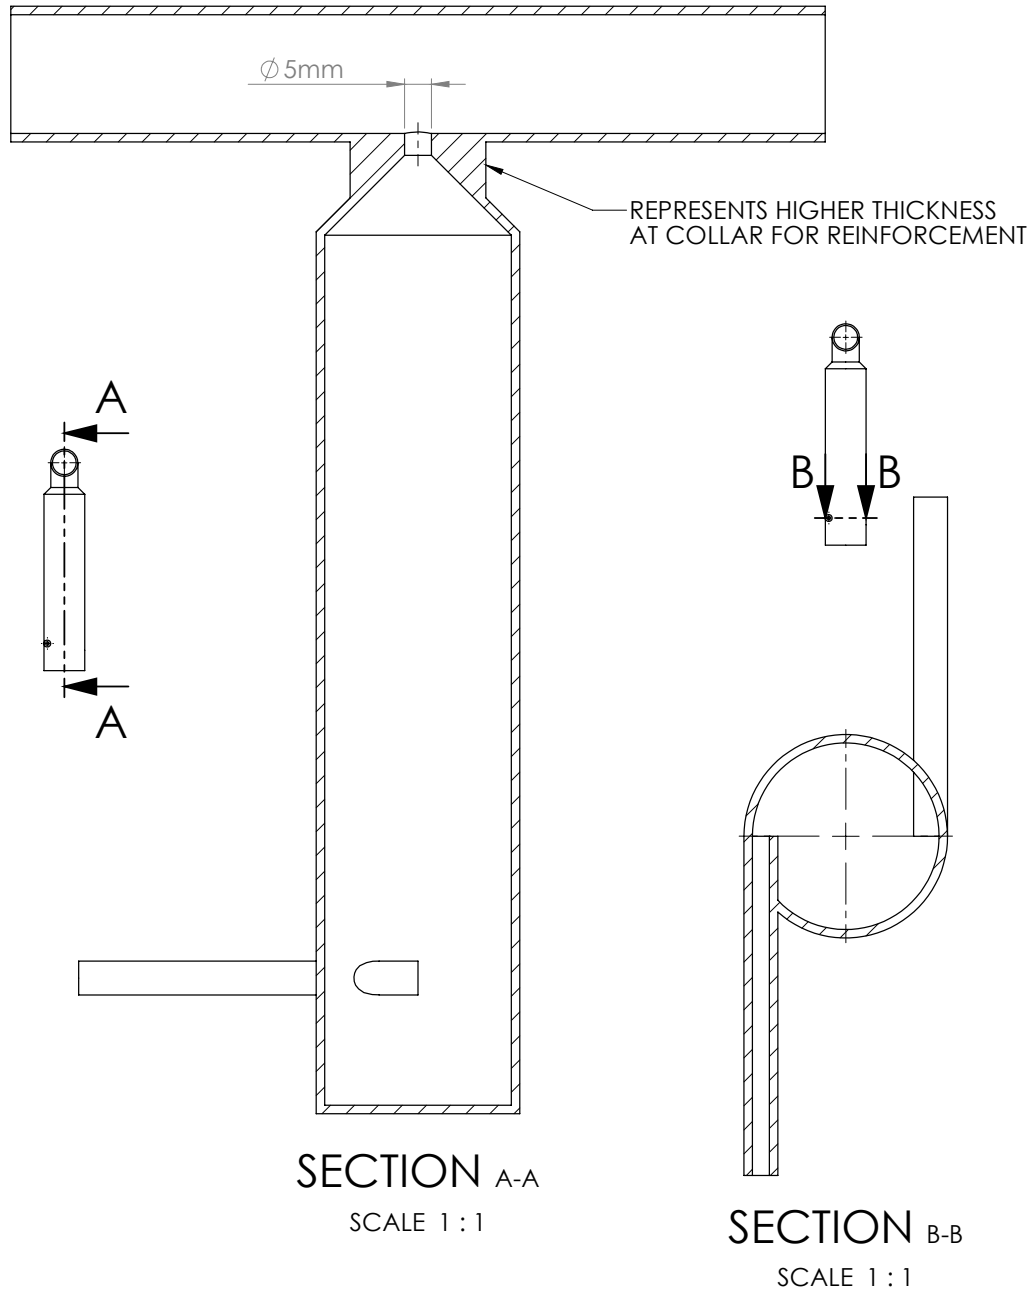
Quartz ICP cell #1 engineering drawing, section view.
